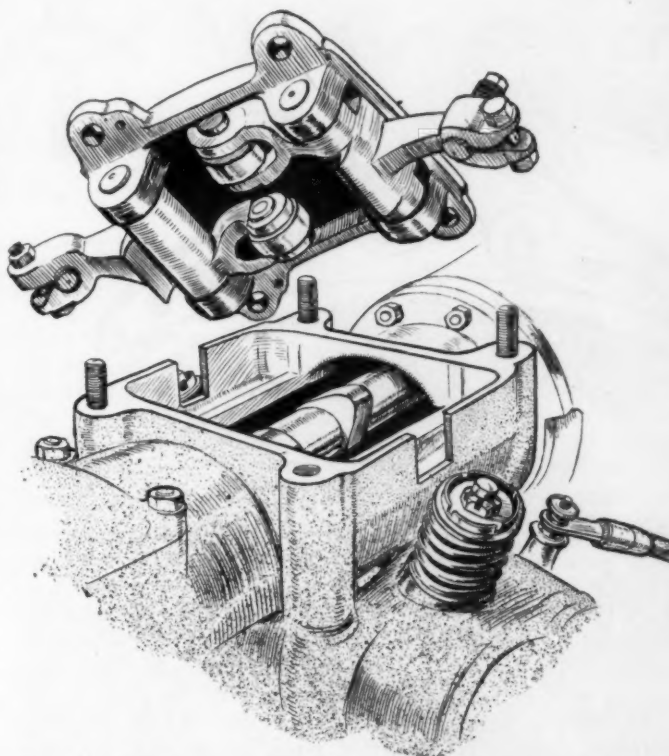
THE OVERHEAD CAM MECHANISM ON THE STRAKER-SQUIRE SIX-CYLINDER ENGINE IN WHICH THE VALVES ON THE OPPOSITE SIDES ARE OUTSIDE THE CAMSHAFT CASING
